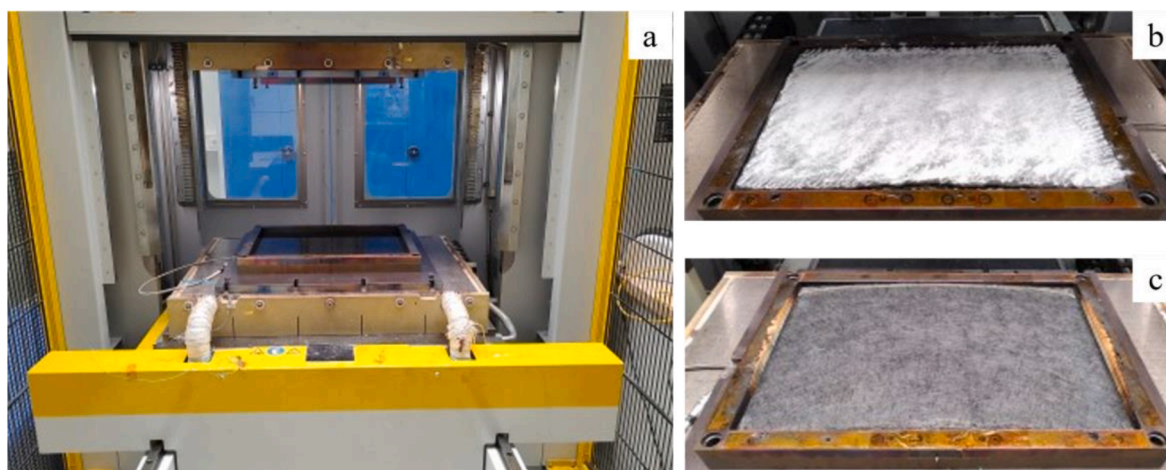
Equipment and materials used for nonwoven processing. a) Langzauner hydraulic press with heatable and coolable mold b) TP material charge in the mold before hot pressing c) TS charge in the mold before compression molding.
